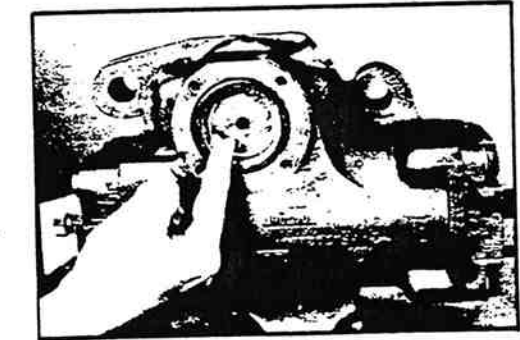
Apply Grease to Retain Bearing Rollers.
